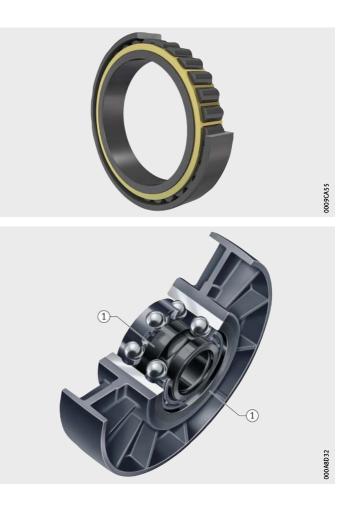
Single row cylindrical roller bearing with Durotect B coating
